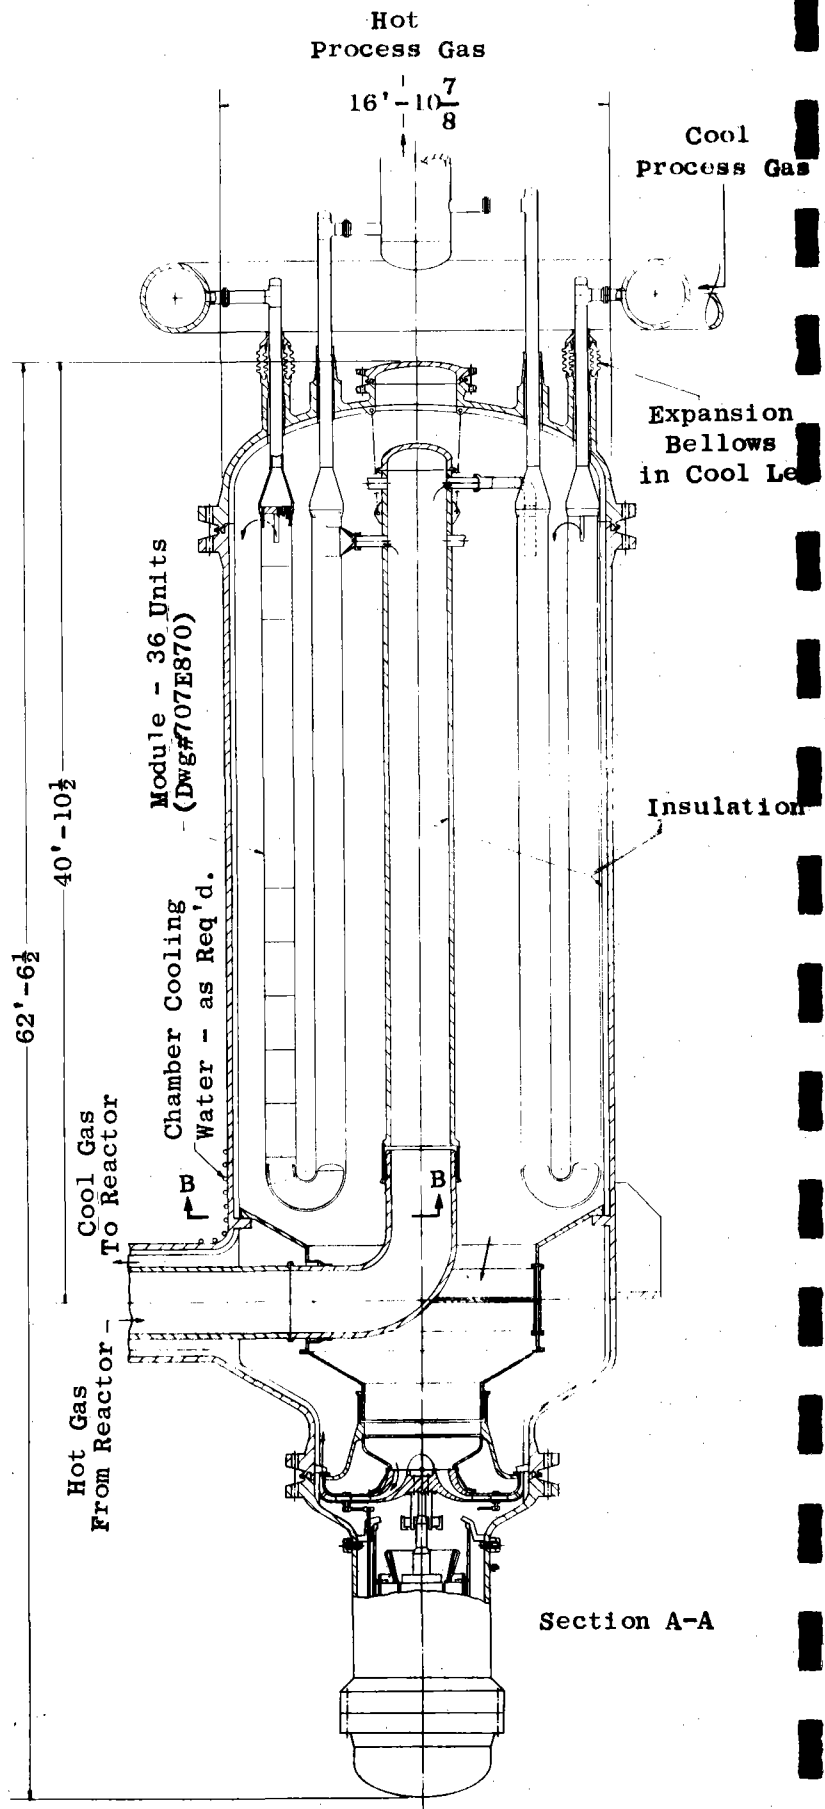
Engineering Drawing of Reference Design IHX Featuring 36 U-tube Style Modules. (Drawing No. 707E871)
